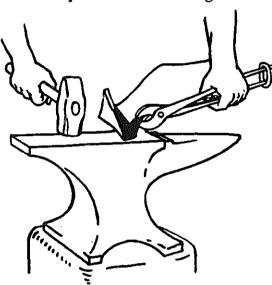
WELDING A SPLIT POINT TO SHARE AND LANDSIDE
